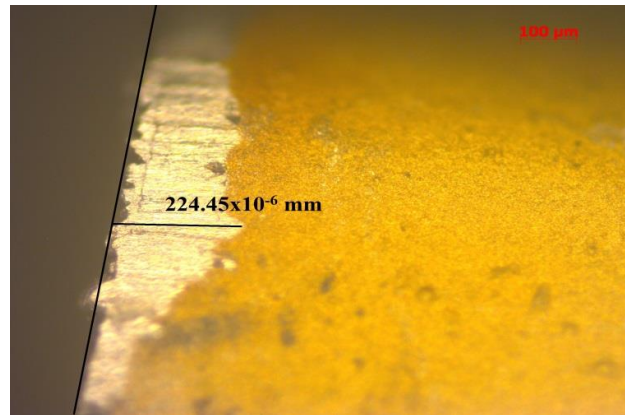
(a) Flank wear for CVD coated tool for spindle Speed 421 RPM, depth of cut 0.6 mm, feed rate 0.12 mm/rev
